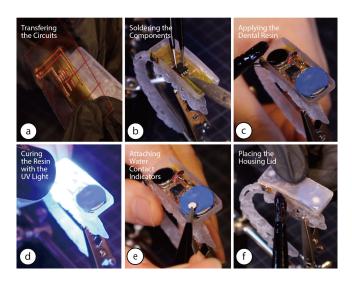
(a) Adhering the circuits to the housing base with a transfer paper. (b) Soldering all electronic components. (c) Applying the dental resin around the soldered connections, (d) and curing it with a UV flashlight. (e) Attaching water contact indicators. (f) Placing the PCB housing lid on top of the housing base.
